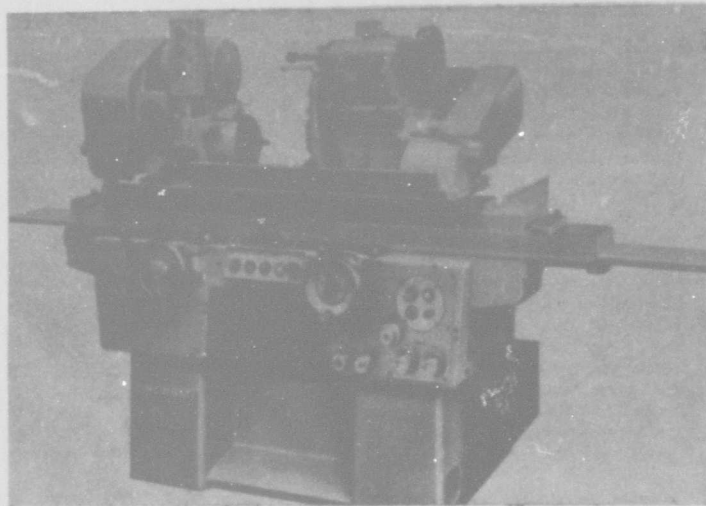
PHOTOGRAPH OF GRINDING MACHINE #1
